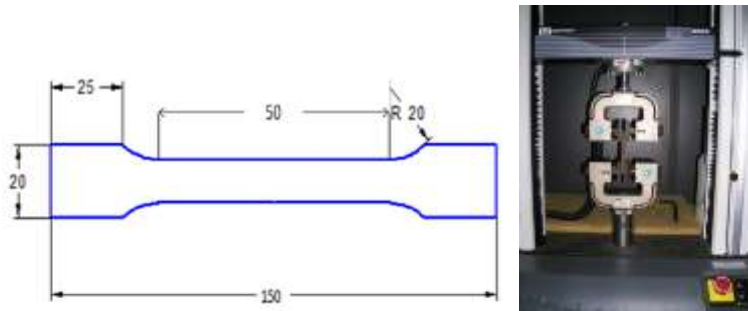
Tensile test specimen & Computerized Universal testing machine
